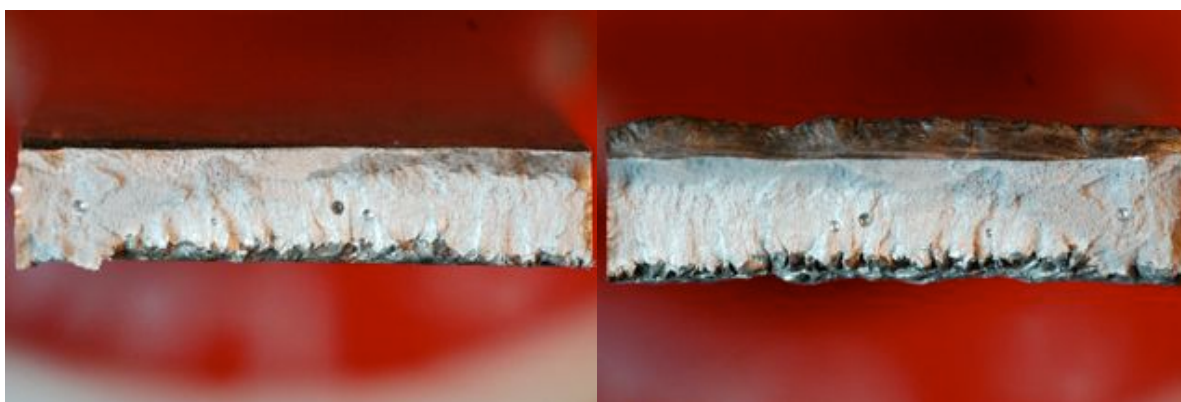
shows a defective specimen before the fatigue tests. Welding defects can be seen by naked eye, but their influence on fatigue life is difficult to predict from this point of view.
